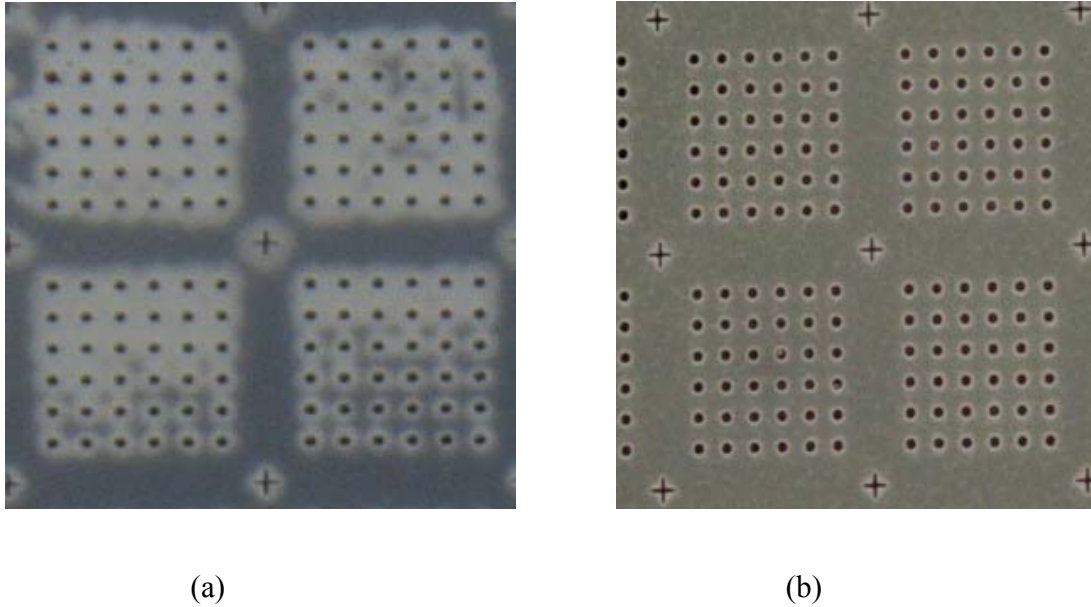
Delaminated surface coatings (a) and good surface coatings (b)
